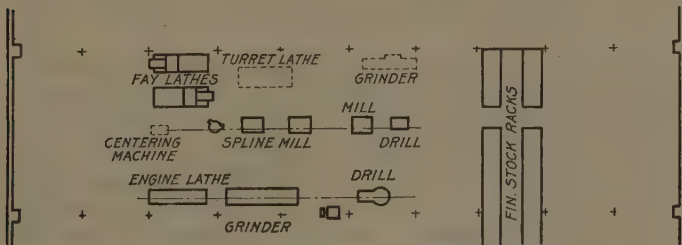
LAYOUT OF SHAFT AND SPINDLE DEPARTMENT
